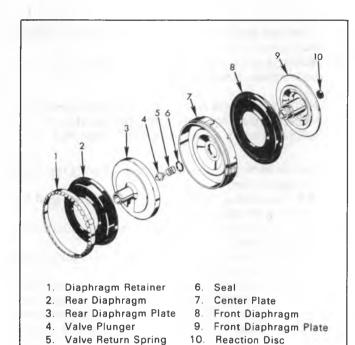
C--Removing Diaphragms, Plates, Retainer and Plunger
